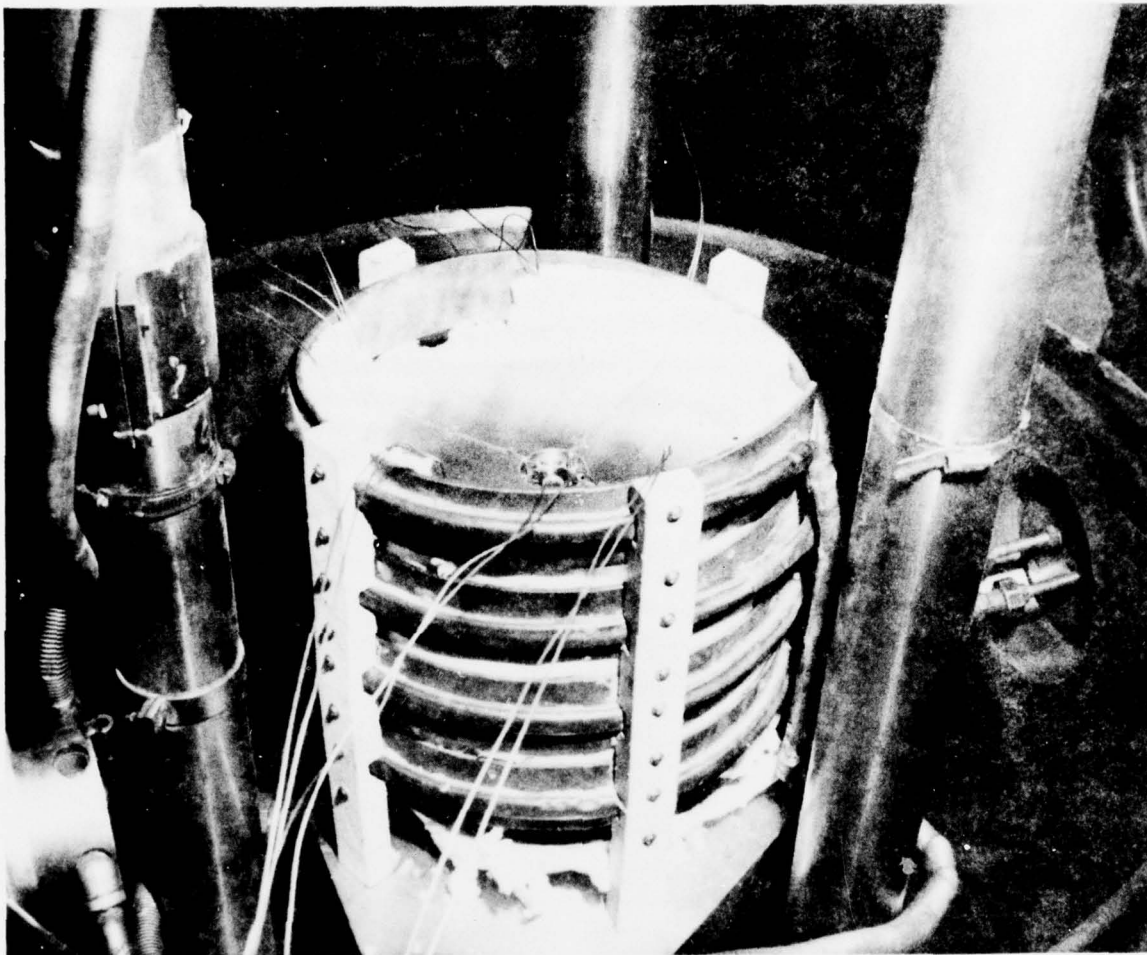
View of the Furnace Induction Coil with the Bonding Assembly Placed Inside, and the Placement of the Fiberfrax-Felt Insulation.
